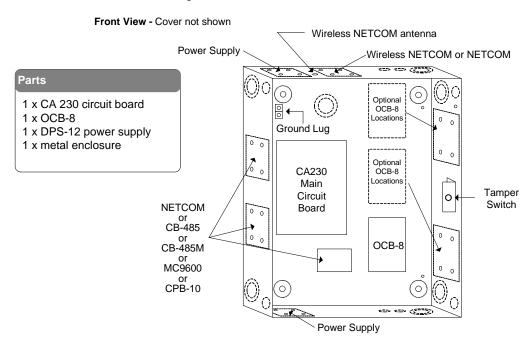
CA 4000 with Circuit Board Mounting Positions
